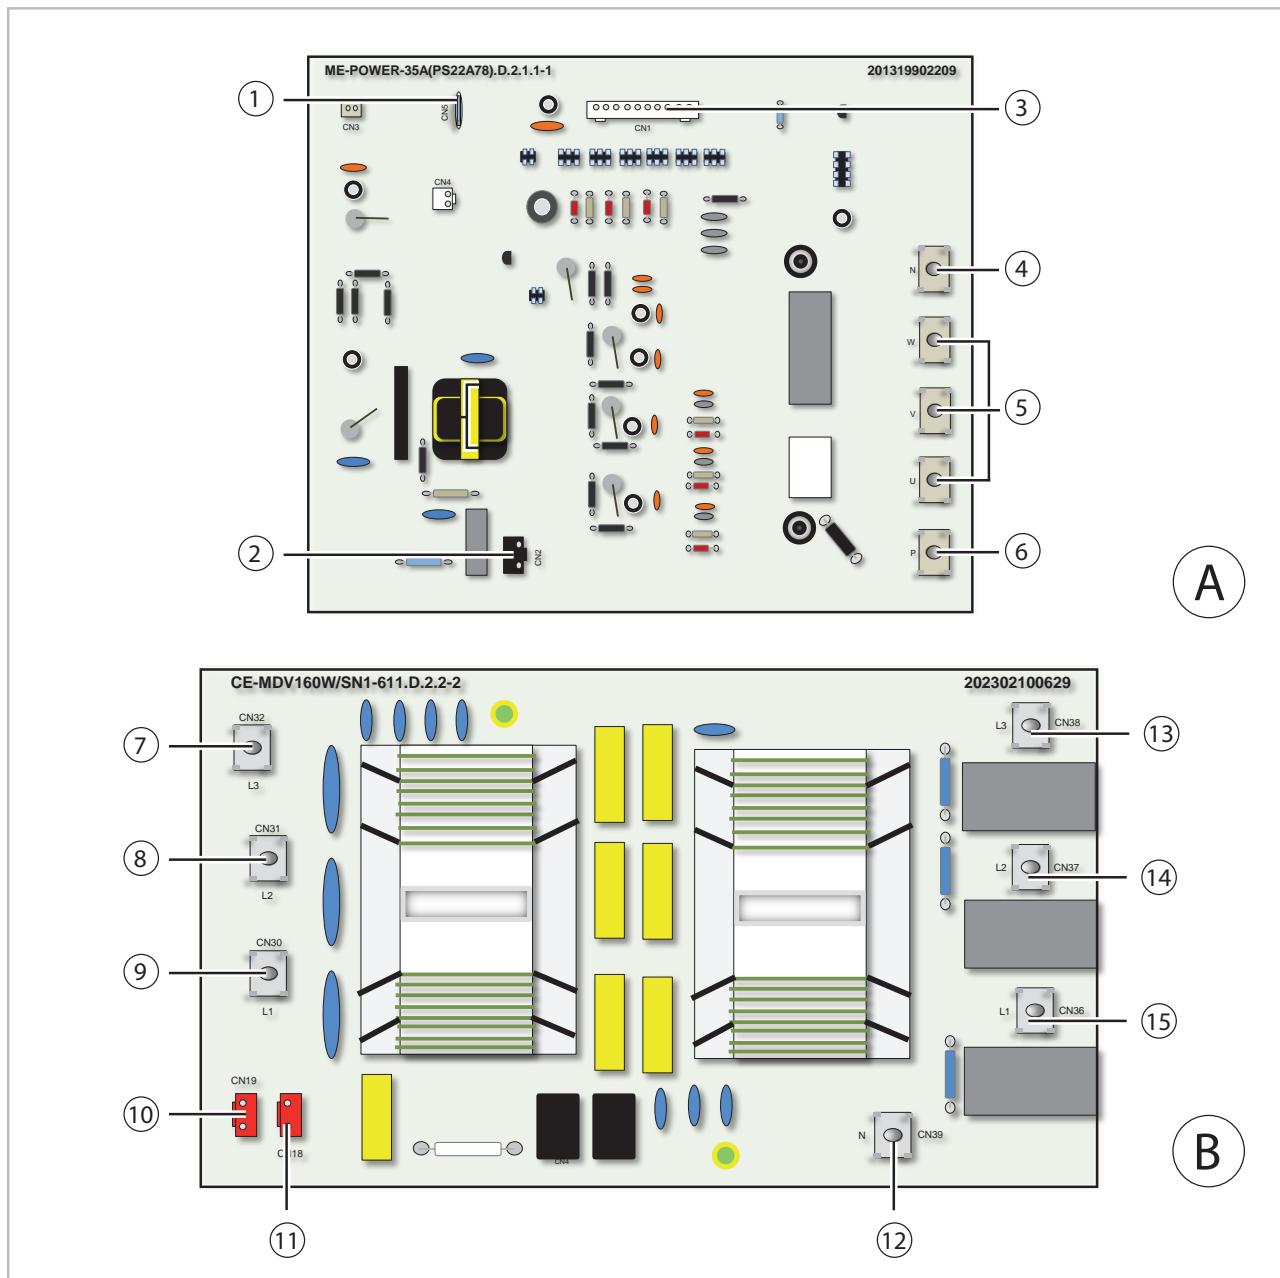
Electrical drawings MVV 1600 DC - inverter and power pcb
